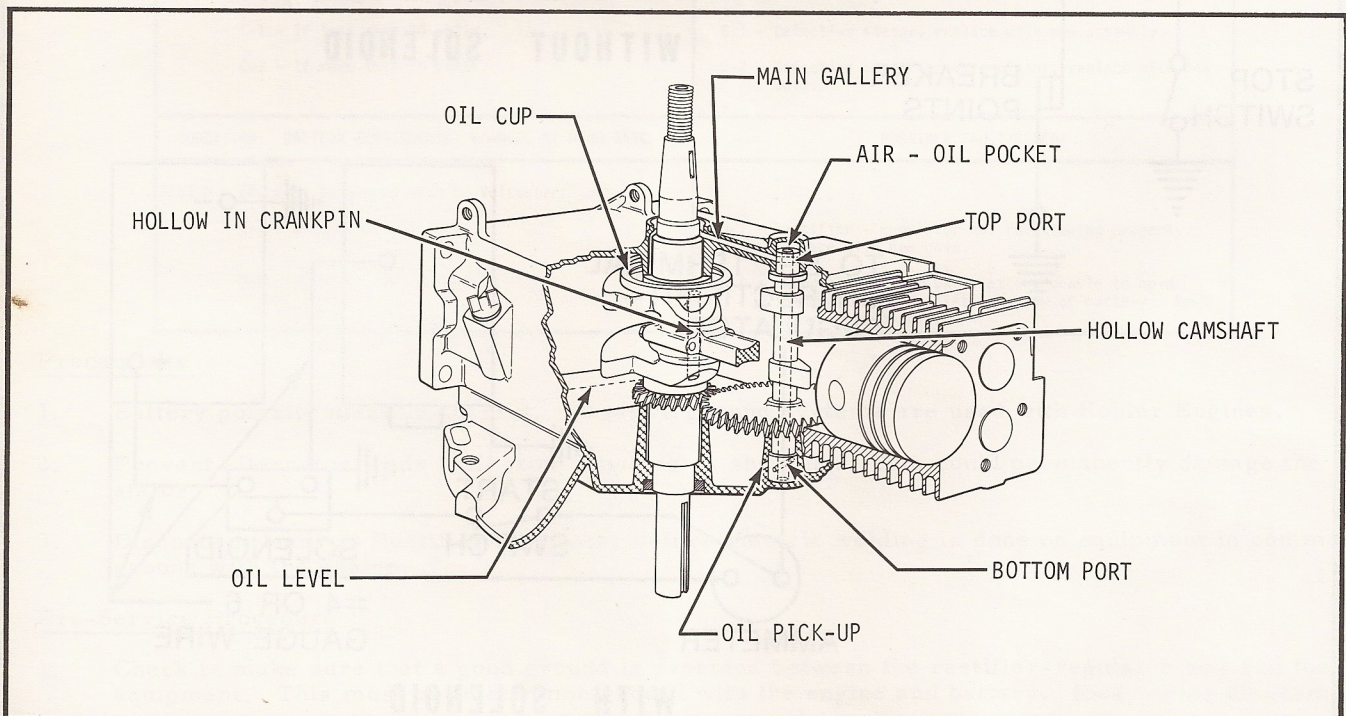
CUTAWAY VIEW, KV101 ENGINE
